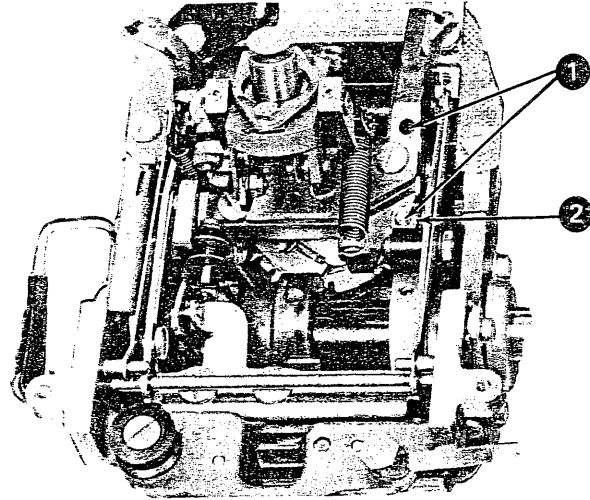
Rotate-Spring Replacement (Steps 5 and 6)
